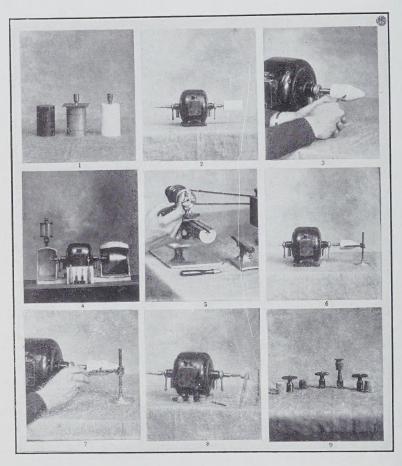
TURNING ON THE DENTAL POLISHING LATHE
